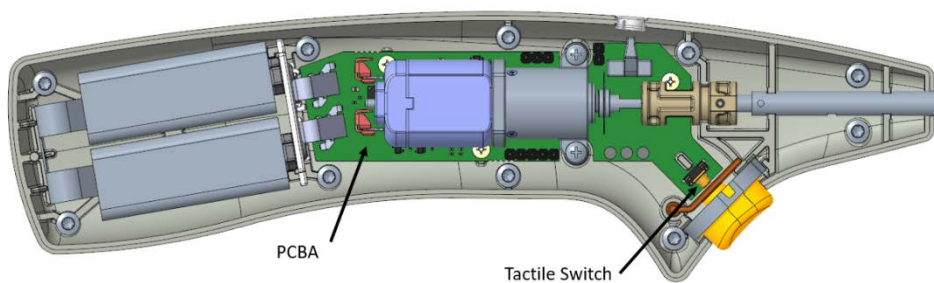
MaxTack™ Motorized Fixation Device Handle Internal Assembly
